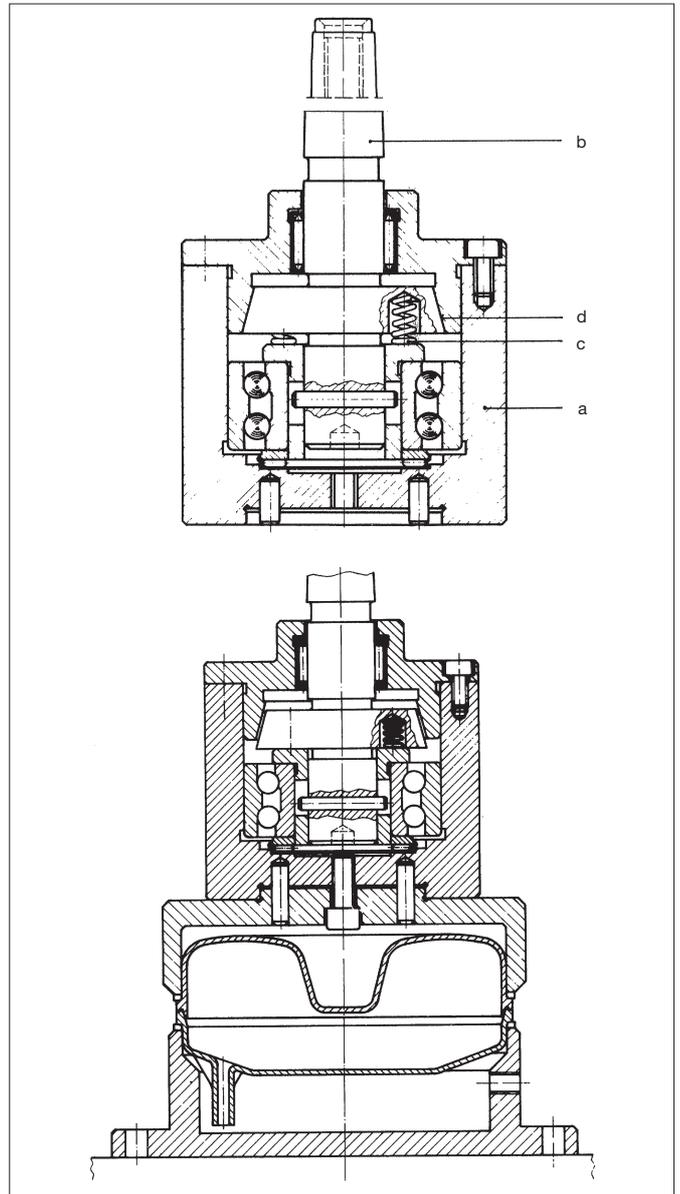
Inertia Welding, Mechanical Coupling
